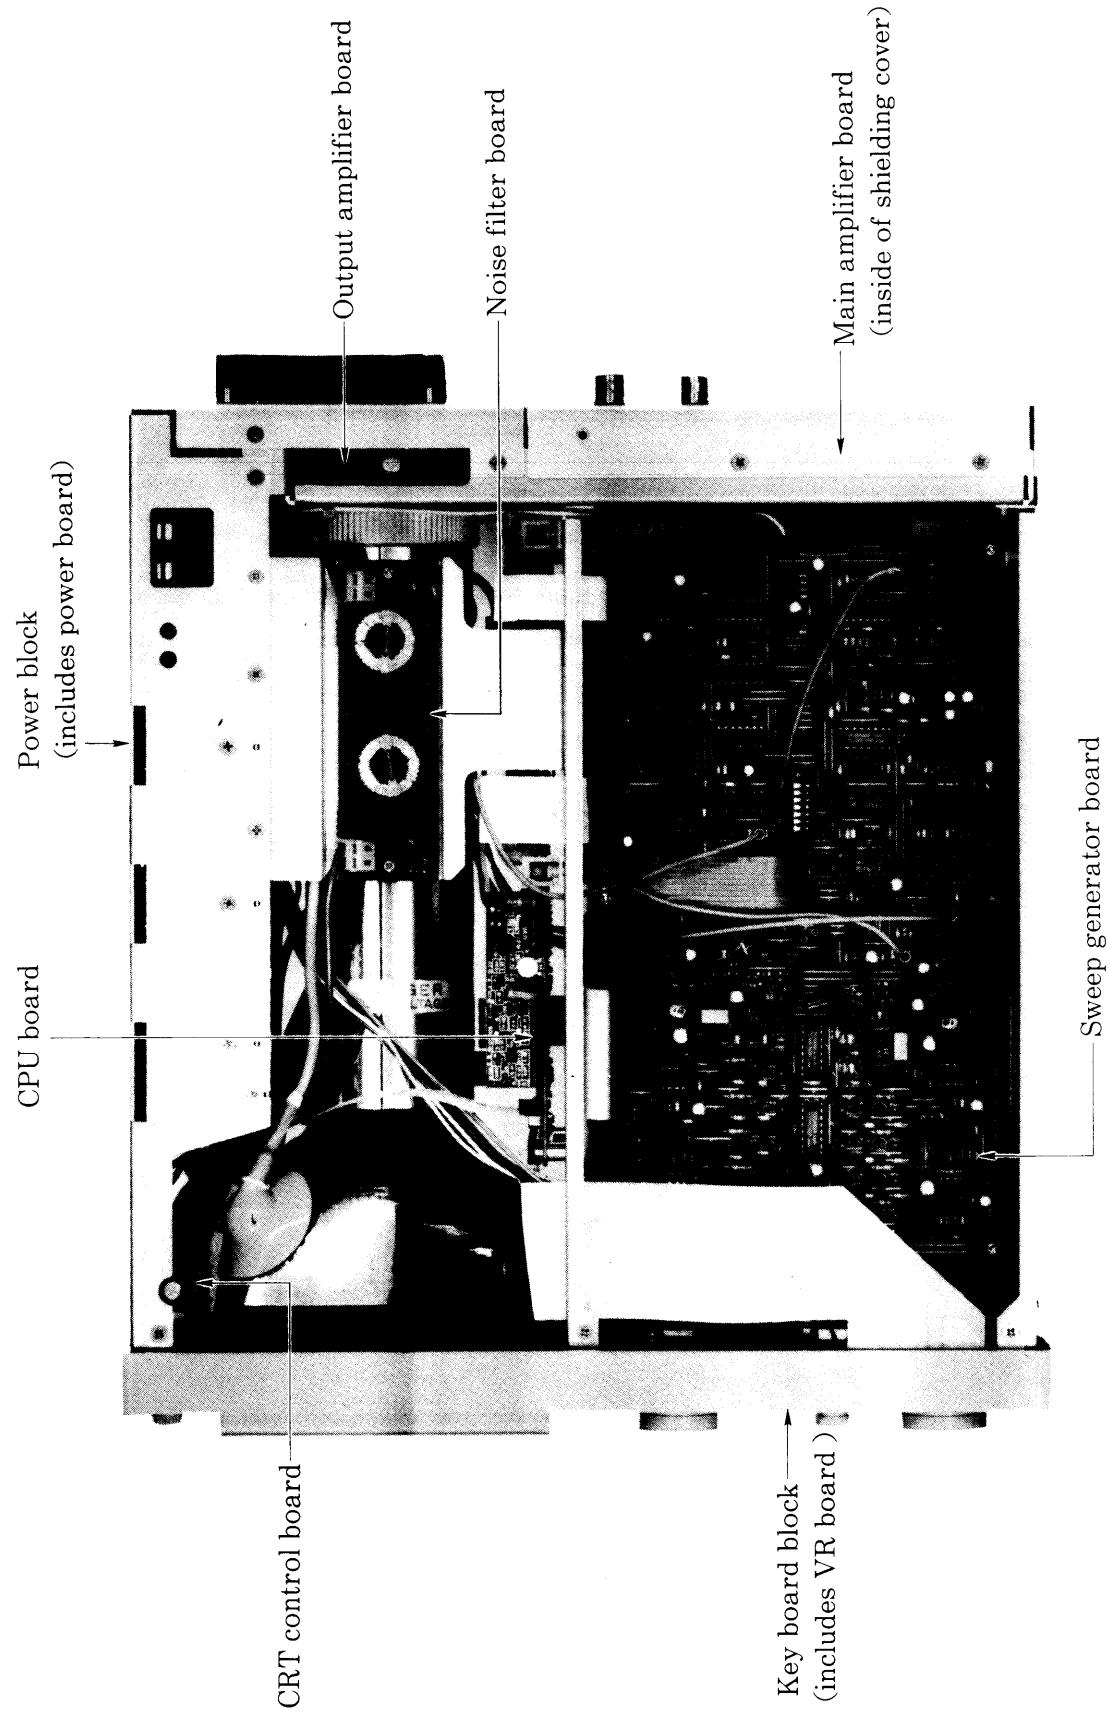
(c) Printed Circuit Board Location / Bottom view
